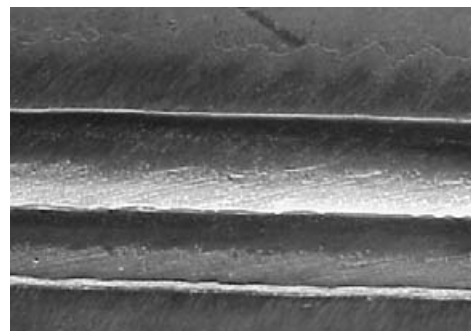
This multiple pass Tandem GMAW weld has a finished appearance that resembles a Submerged Arc Weld.
